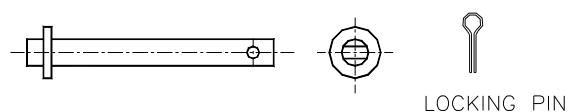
New lifting pin and locking pin for damaged fuel element.
